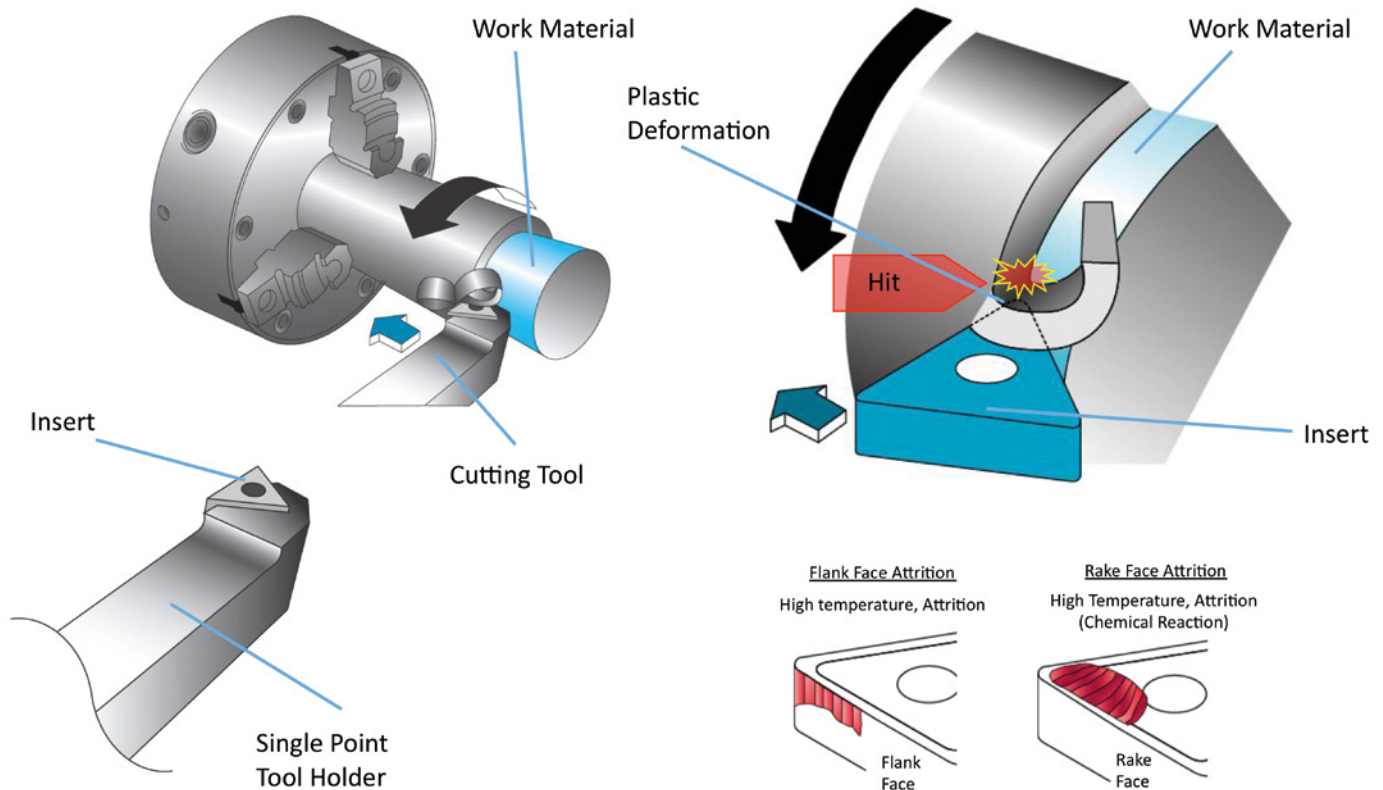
Typical Cutting Bits used in Lathe Turning and the wear issues they face
